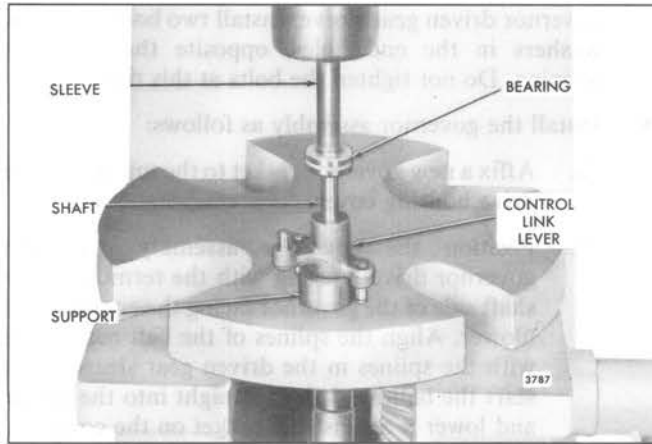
Installing Bearing on Governor Control Link Lever Shaft
